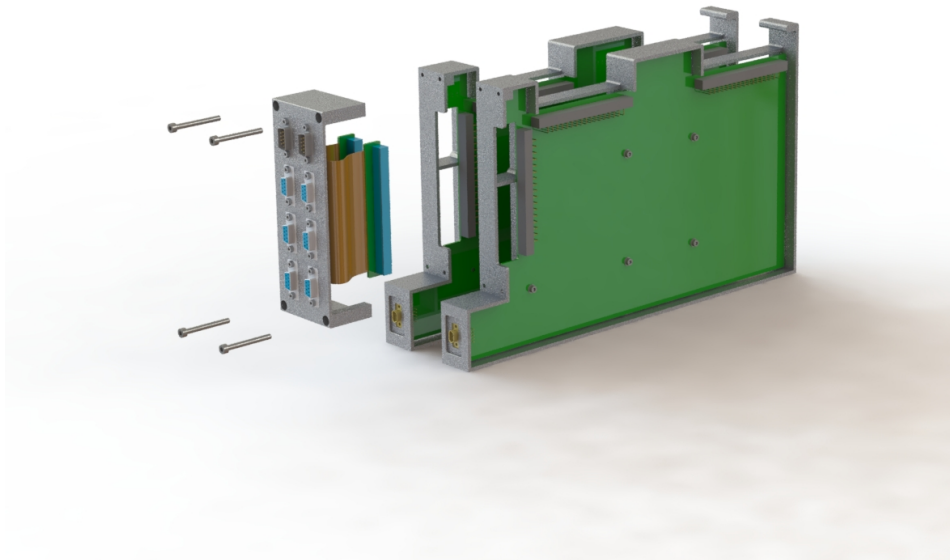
Exploded view of redundant board crossstrapped to the same output pins via a PCB with flexible sides. Courtesy of Evoleo Technologies.
